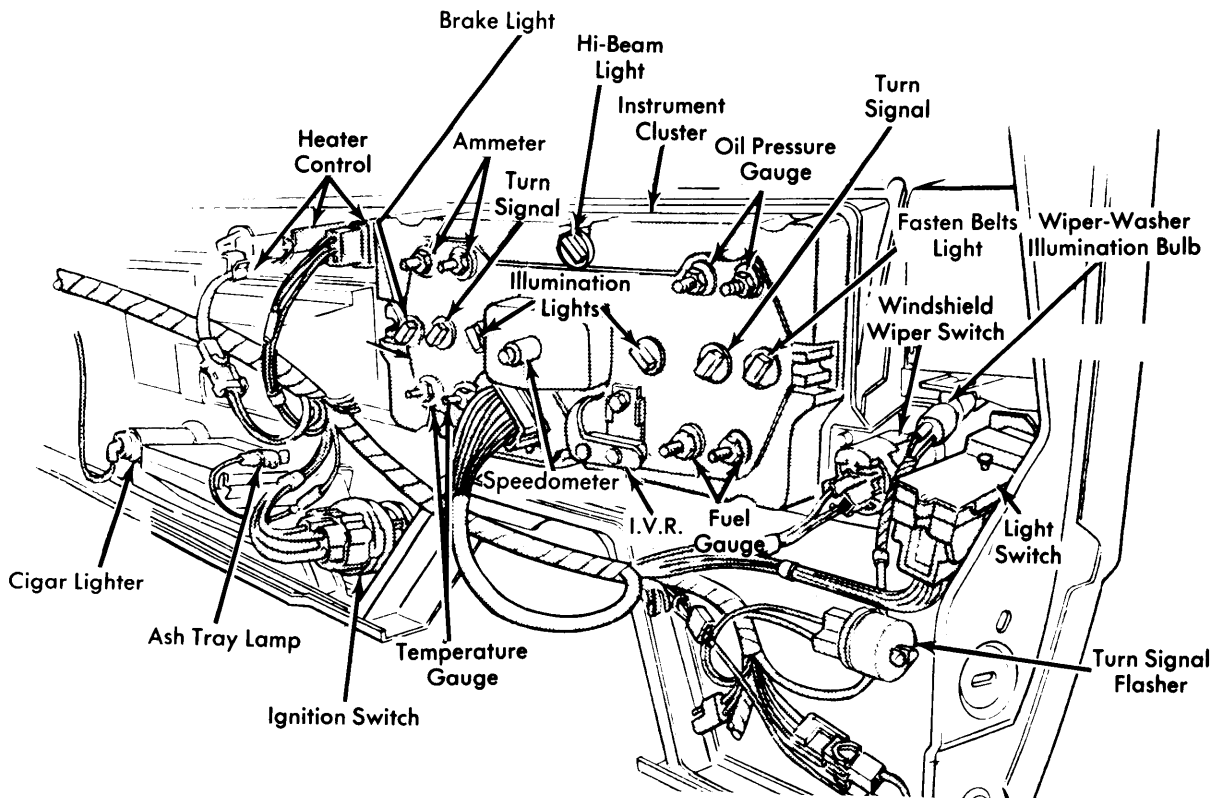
Exploded View of "F" Models Instrument Cluster (Back View)
